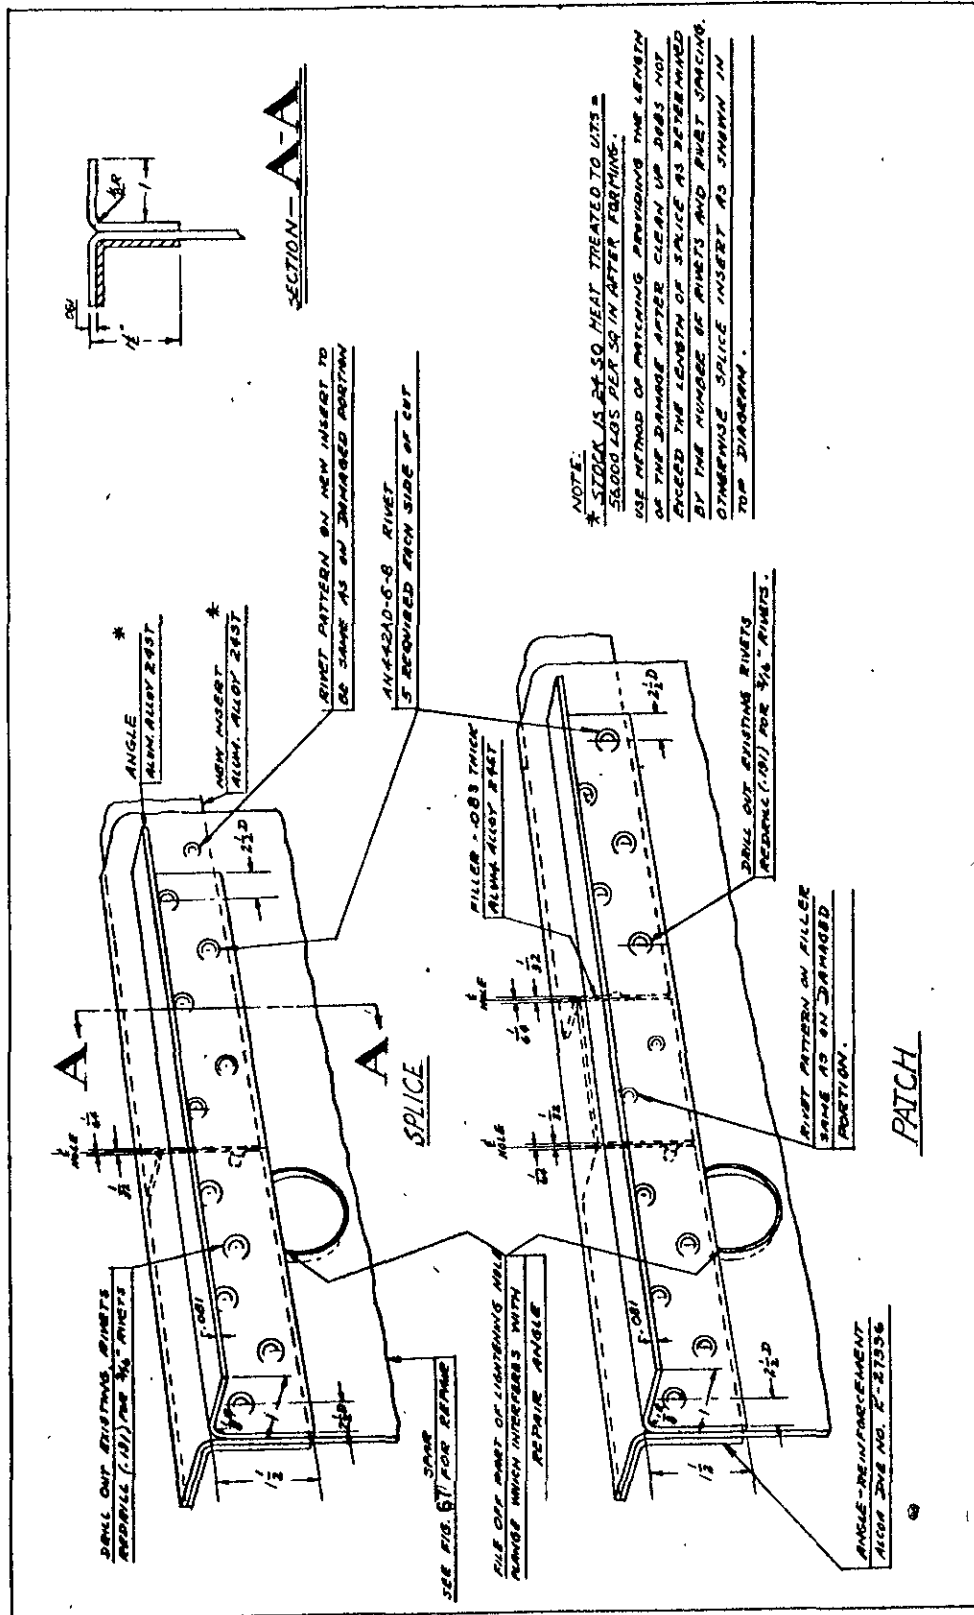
Spar No. 5 - Upper Surface - Sta 139 to 179 - Angle - Reinforcement Splice
